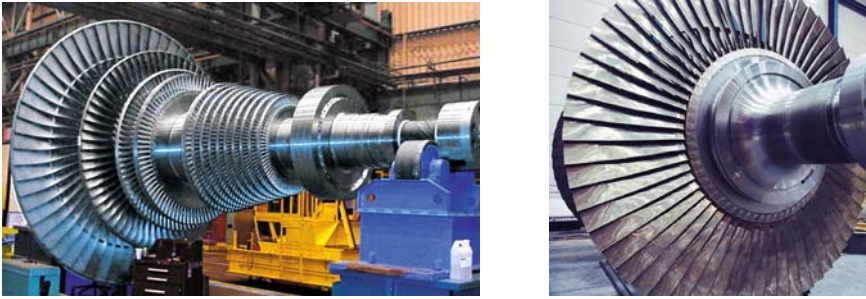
Steam turbine rotor (courtesy Siemens AG)
